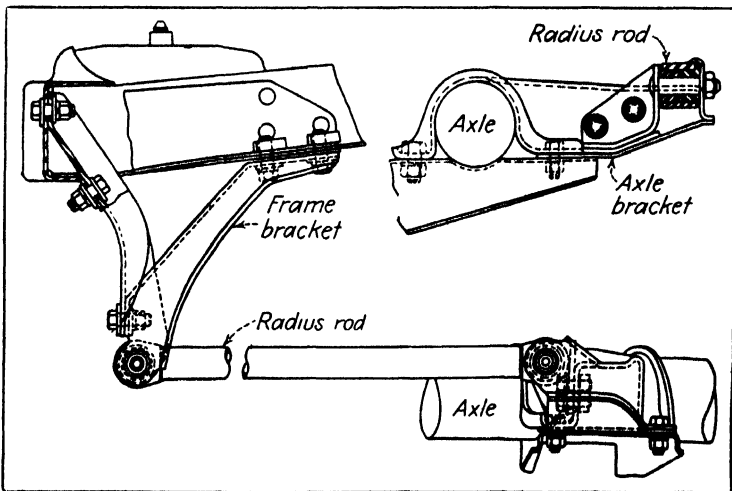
TRANSVERSE RADIUS ROD USED WITH COIL SPRINGS.
